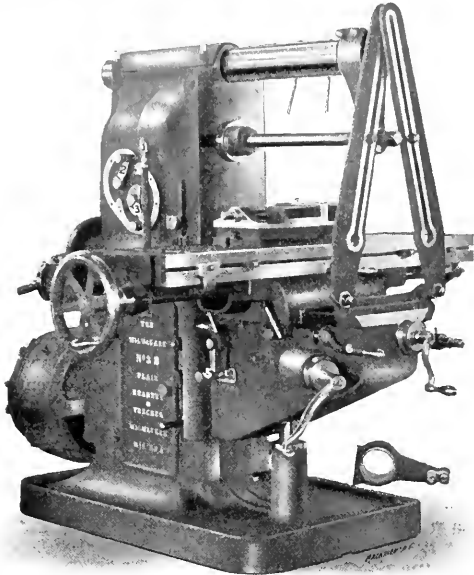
Heavy Geared Drive Milwaukee Miller.
